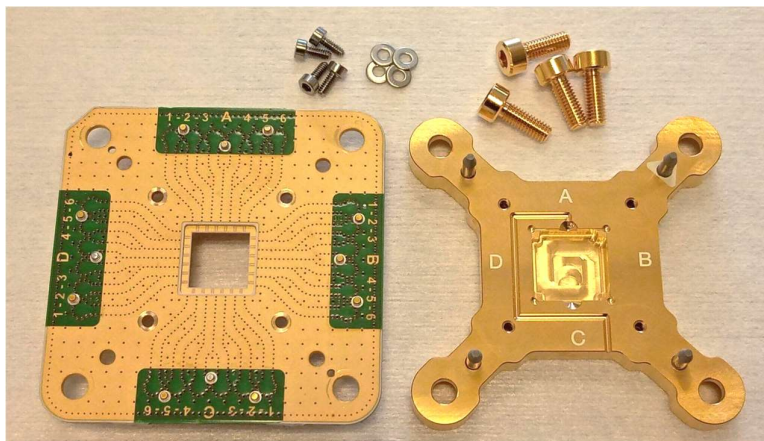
Left) Sample board (QCAGE-24-PCB). Right) Support frame (QCAGE-24-FRM) with mounting screws.
